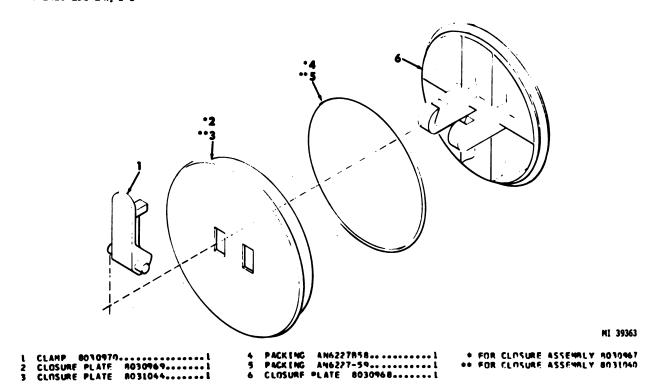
CLOSURE ASSEMBLY, SHIPPING /8030947 AND 8031040/ /SEE FIGURE 137 FOR NEXT HIGHER ASSEMBLY/
